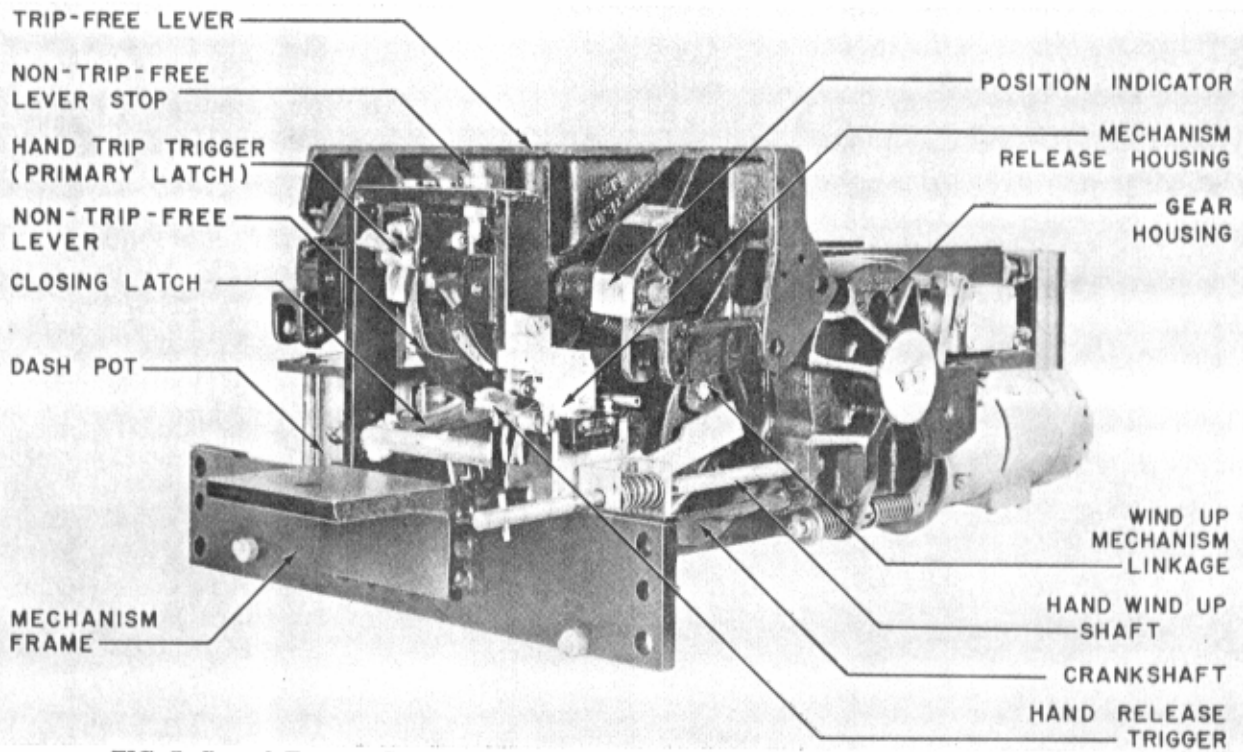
Stored Energy (Spring) Closing Mechanism for Type 150-DH-1000 A.C.B. (3/4 View)
